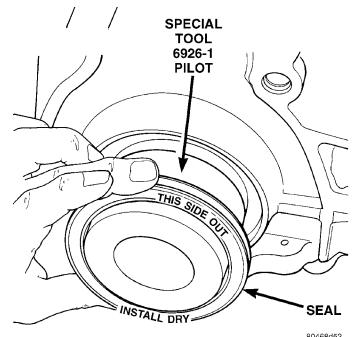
Rear Crankshaft Seal and Special Tool 6926-1
